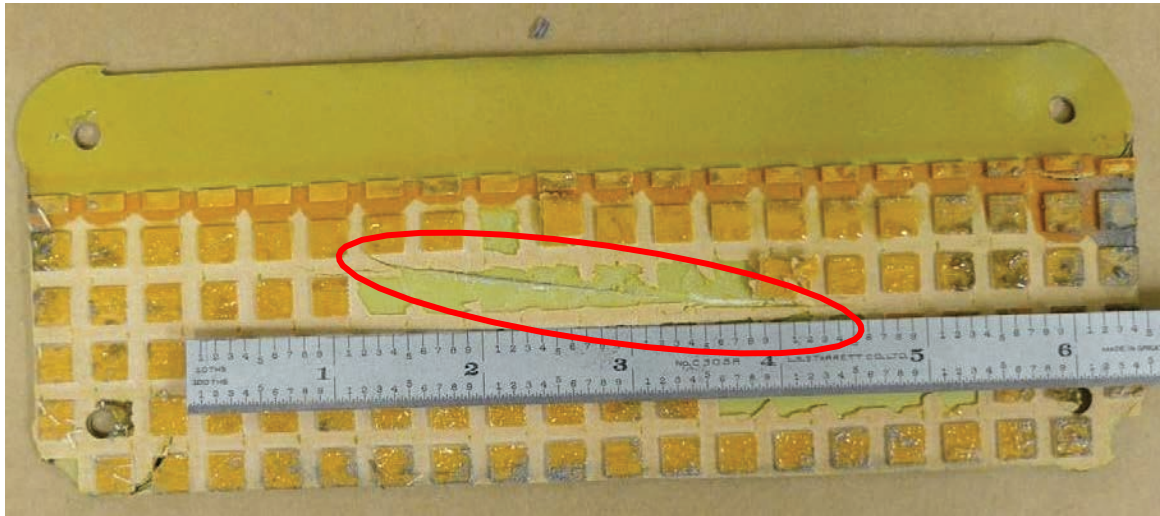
Inner surface of row 24 skin section, showing gouge penetration
